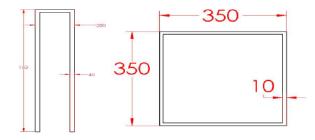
Front (left) and top (right) view of stand for supporting fuel hopper (All dimensions in mm)
